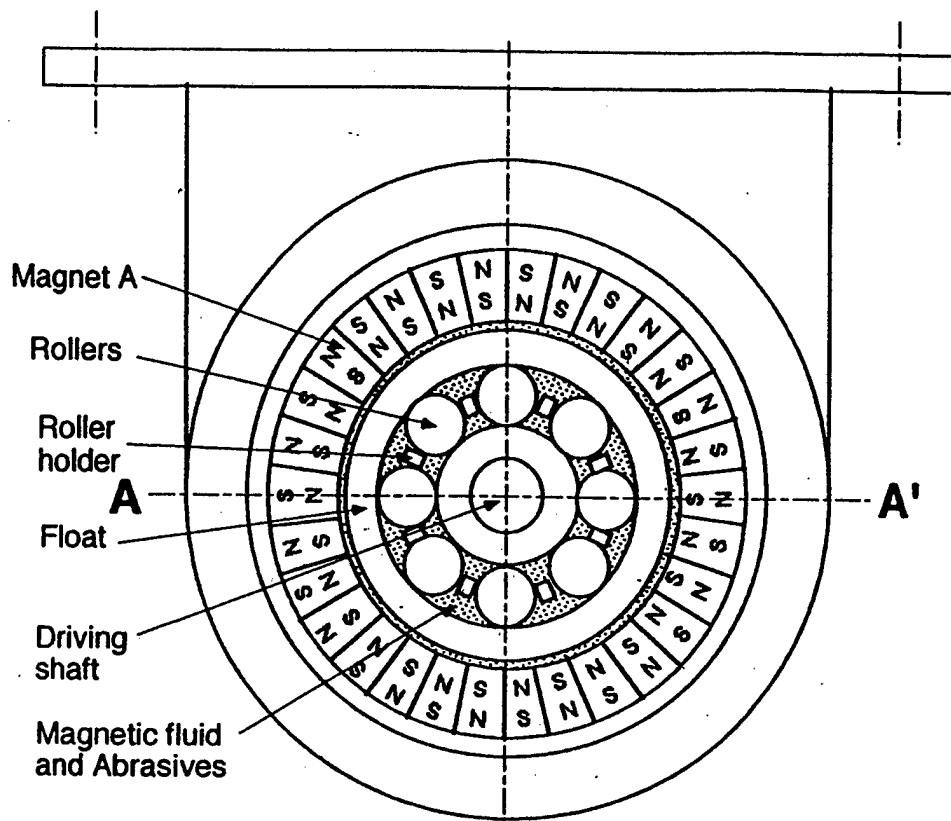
(a) Top sectional views of the magnetic fluid grinding apparatus used for finishing ceramic rollers
